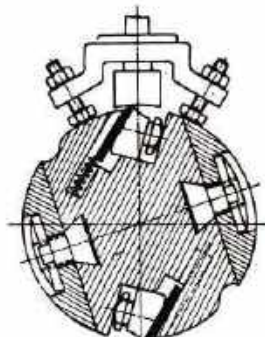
CUTTER HEAD AND KNIFE ADJUSTMENT DEVICE
